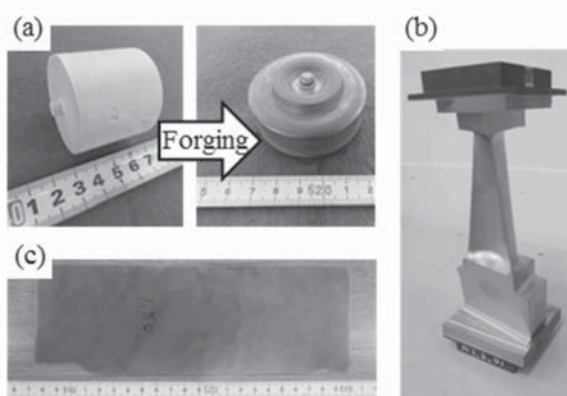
Workability tests of (a) forging (b) machining (c) cold working
